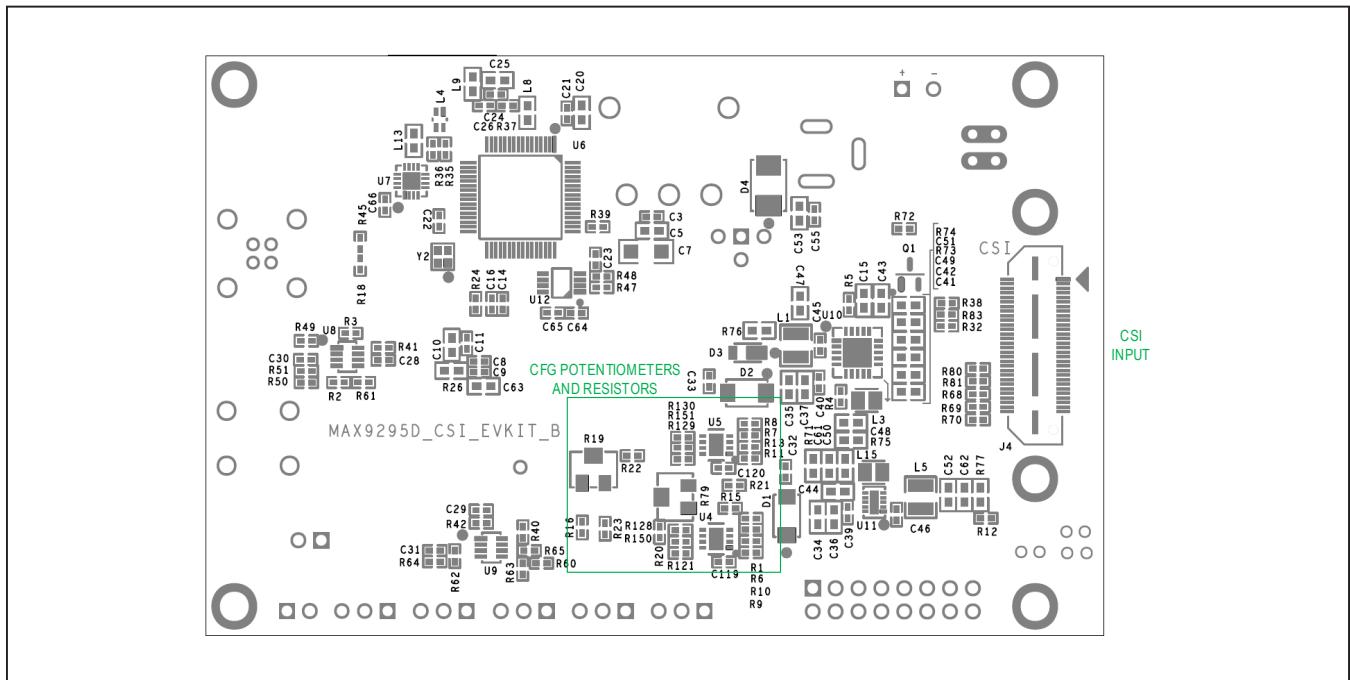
MAX9295D Coax/HSD EV Kit Key Components on Back of Board
